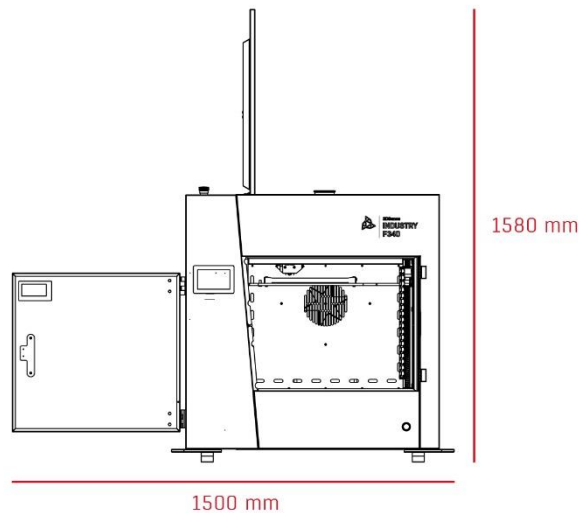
Maximum dimensions of 3DGence INDUSTRY F340 printer – front view
